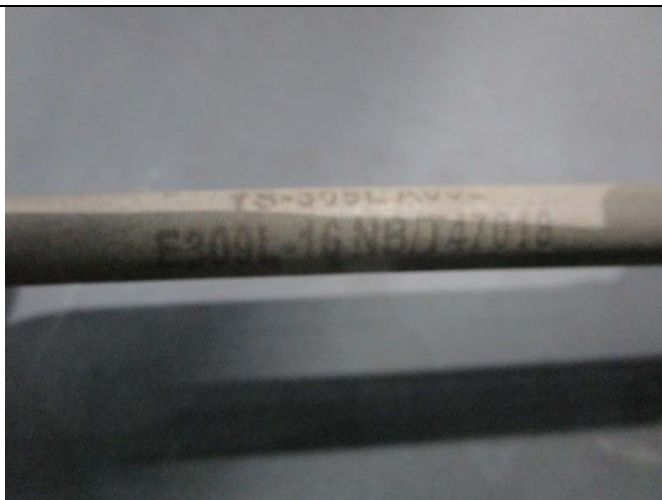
Fitting up check of V1&V2: tack welding parameter
